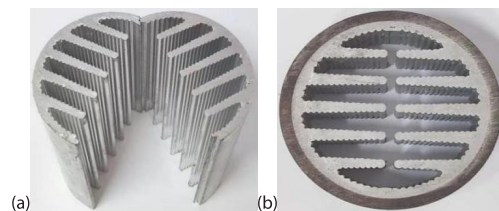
Schematic of axisymmetric inner fins; (a) two axisymmetric extruded aluminum inner fins and (b) axisymmetric extruded aluminum inner fin tube section after interference fit
